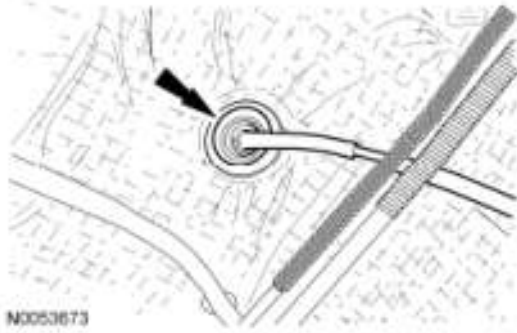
Identifying Transmission Fluid Cooler Tube Bracket
